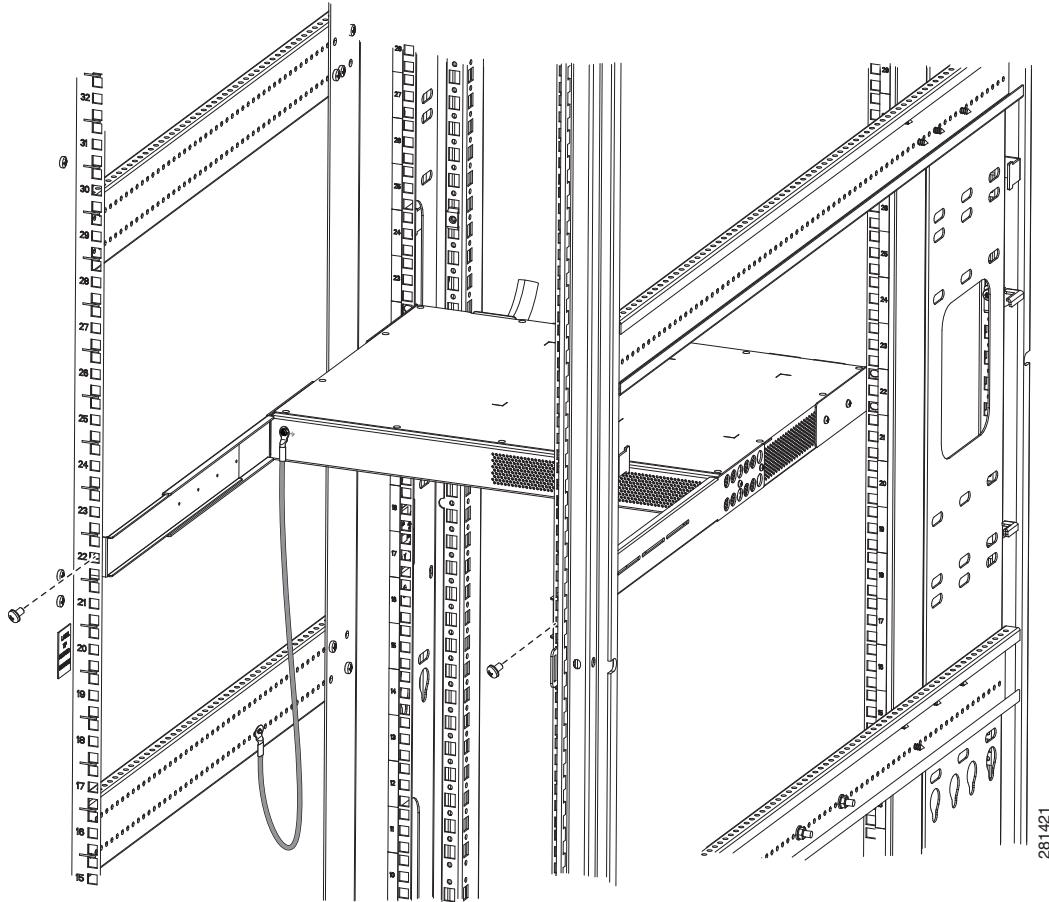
Attaching the Brackets to the Cisco PDU for a 1 RU Mount
